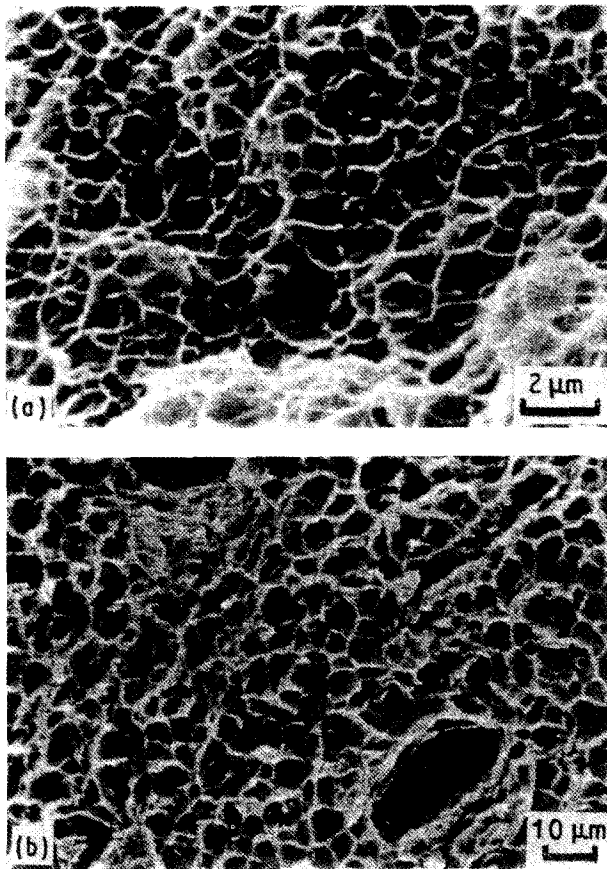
Tensile fracture surface of Al-12% Si alloy (a) as-extruded (b) aged 10 h at 500 °C.
